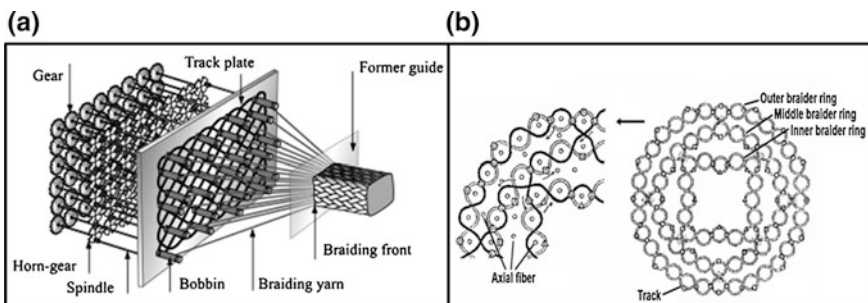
a Schematic view of 3D circular axial braiding based on maypole method. b Sectional schematic views of machine bed and complete machine bed to show predetermined yarn path [9]
